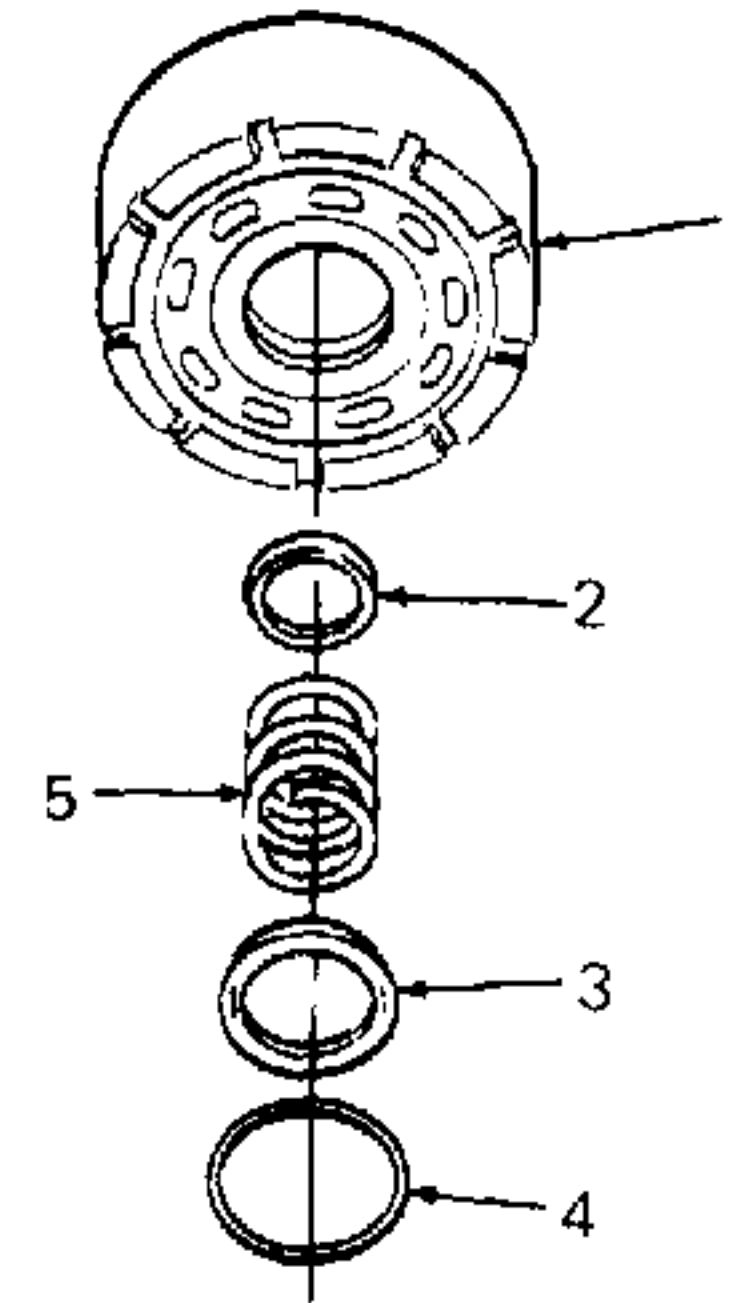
Removing Retainer Ring from Cylinder Block.
